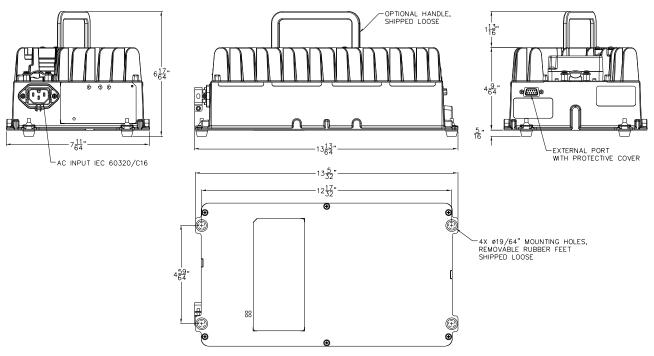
Charger Dimensions and Mounting Hole Locations
